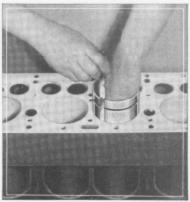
Checking the Piston Clearance with a Feeler Gauge
